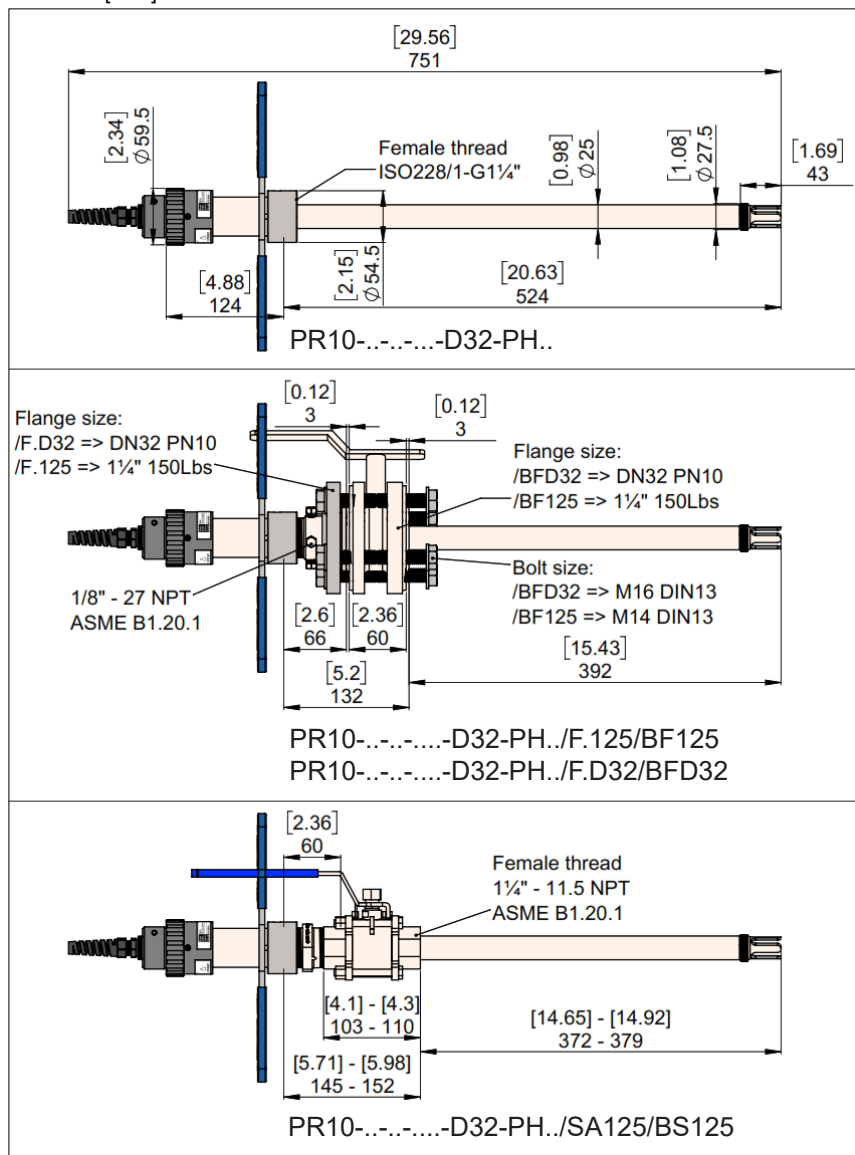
Dimensional drawing PR10...-D32 with mounted pH sensor
